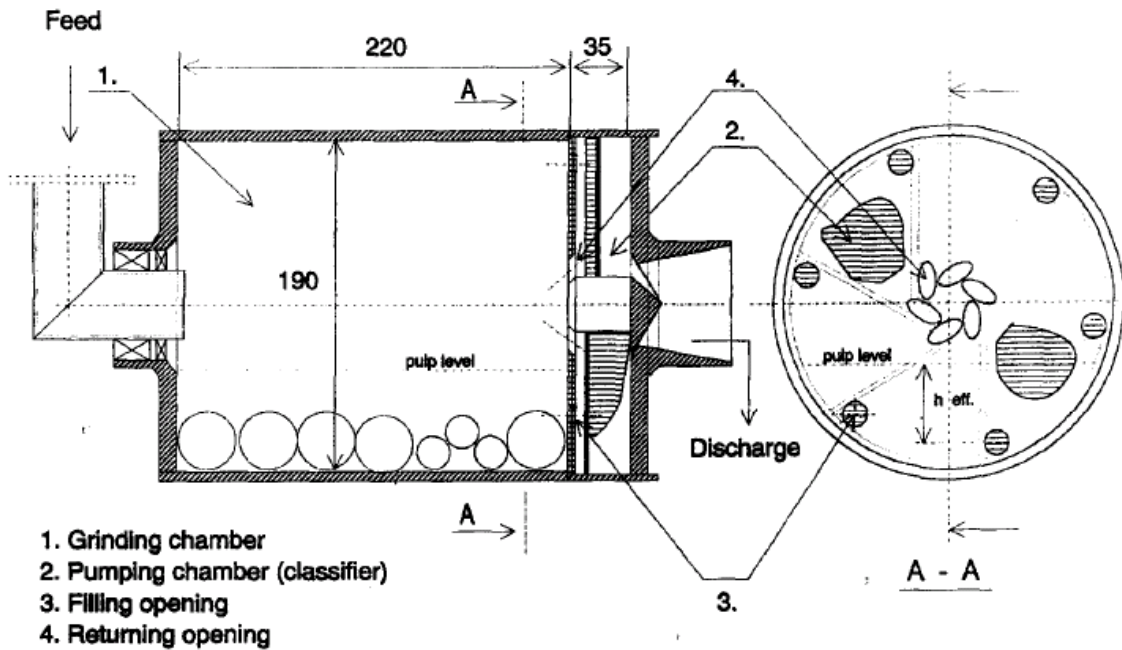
Cross-sectional view of the continuous classifying grinding mill (Hintikka et al, 1996)
